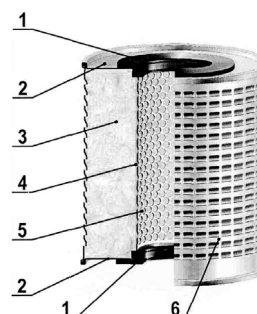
Unwoven fabric oil filter; 1 – sheet rubber gasket, 2 – bottom, 3 – unwoven fabric, 4 – filter pack, 5 – steel core, 6 – perforated steel cover (ref.⁵)
